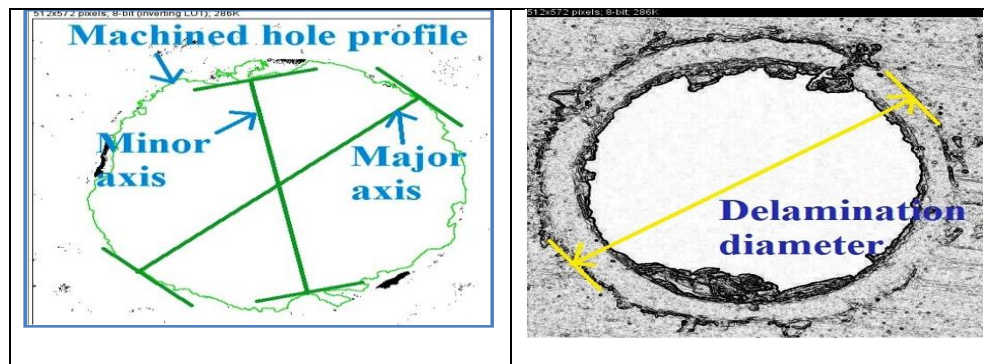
Machined hole profile Figure 2 Machined delamination diameter profile
